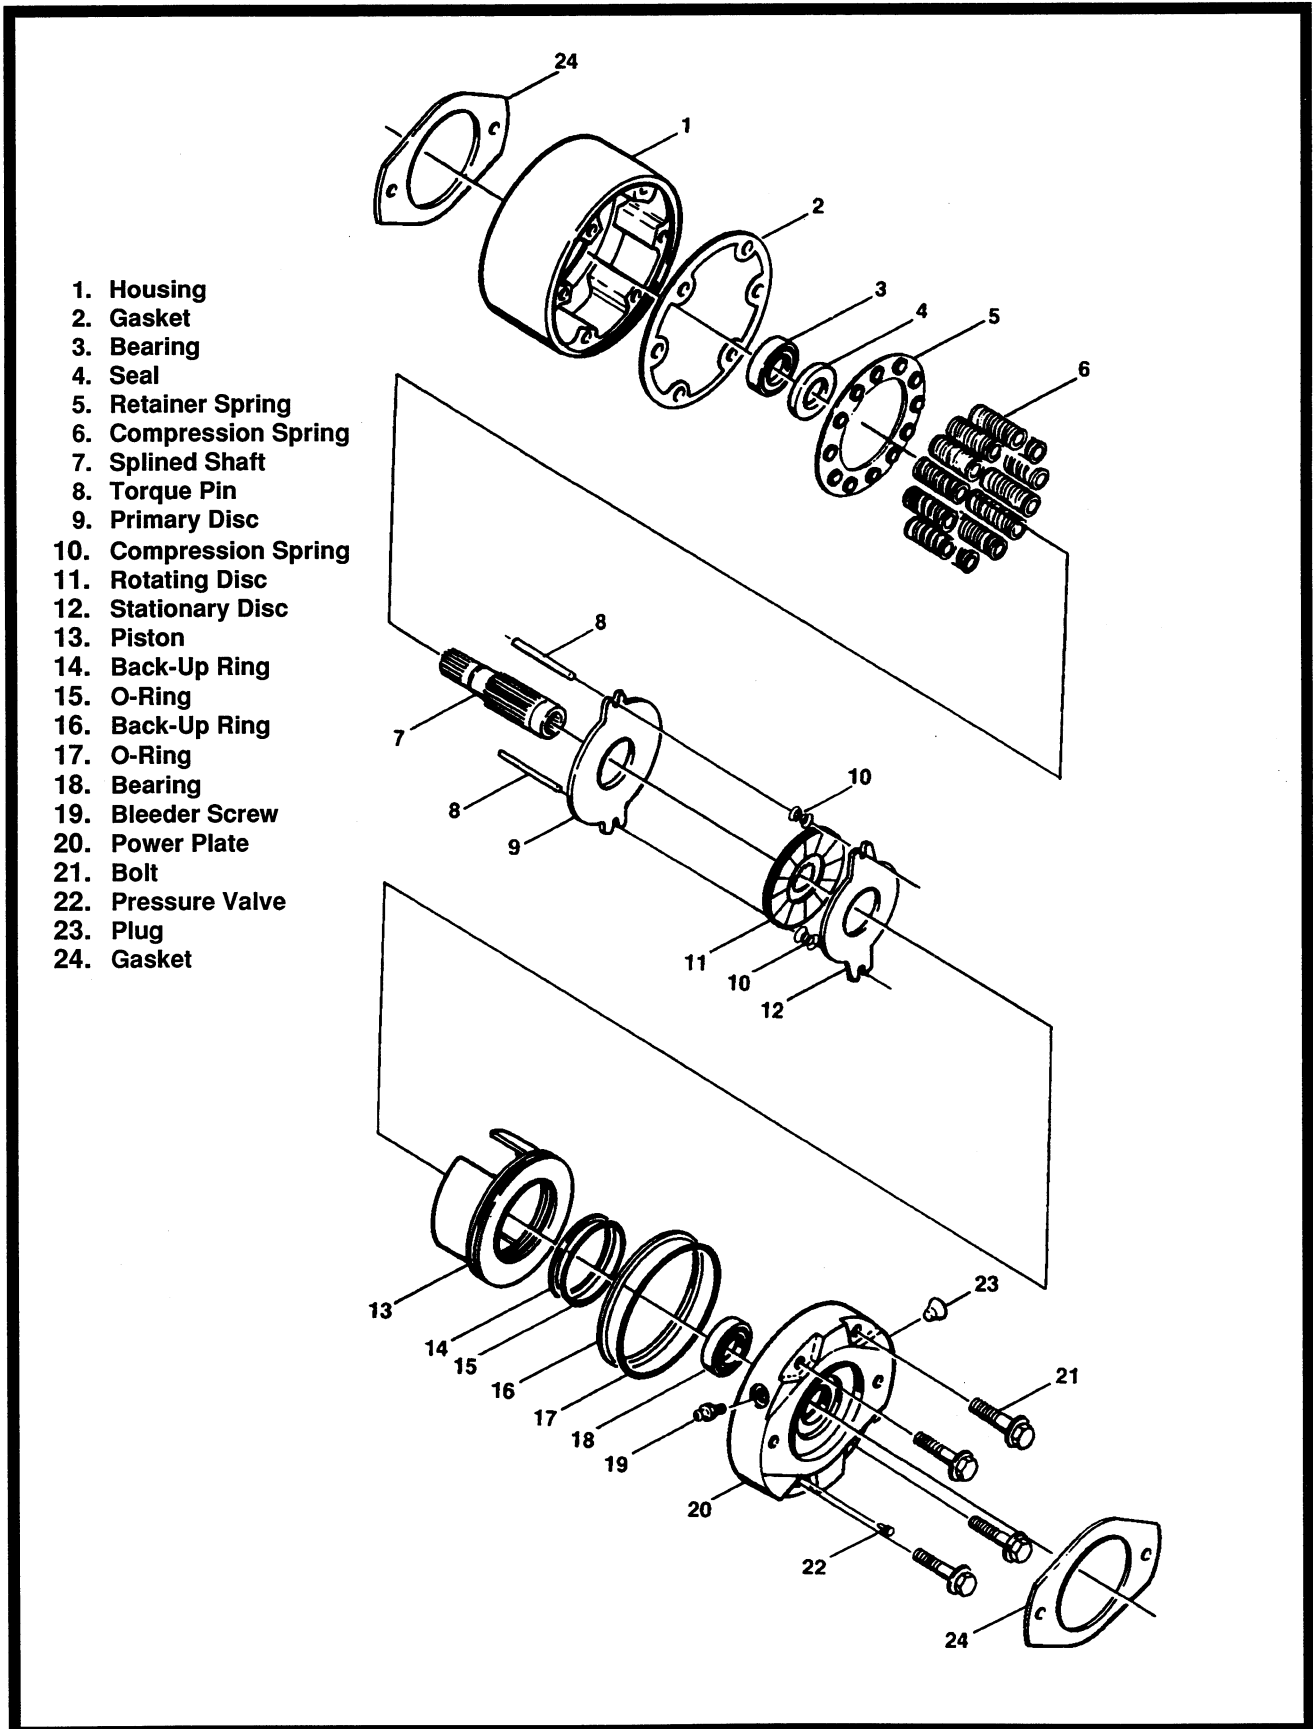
Swing Brake - Ausco (Machines Built From August 1991 To Present).
